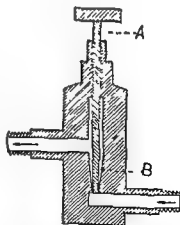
Cross section of a reducing valve of the pin type (A) The pin fits into (B) the seat. If the pin is screwed too tightly the seat is damaged and the fine adjustment is lost
